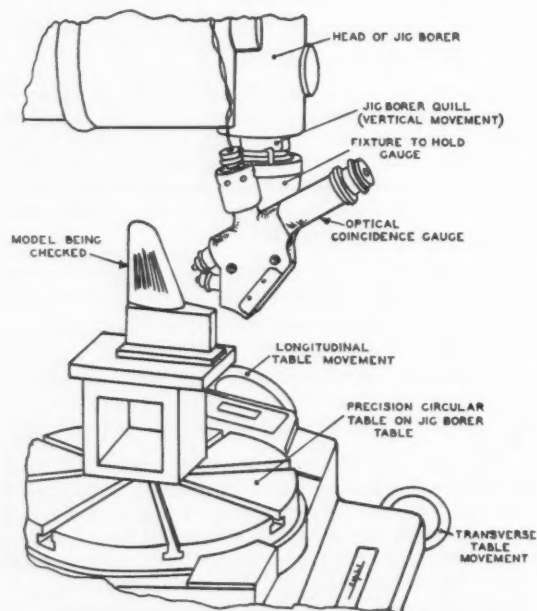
Optical coincidence gauge mounted on jig borer — as used to examine the leading edge of a model tailplane.
